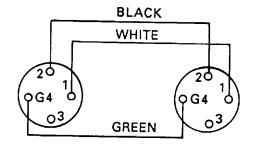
Cable Assembly SC-C-622029, drawing number SC-C-622029.
